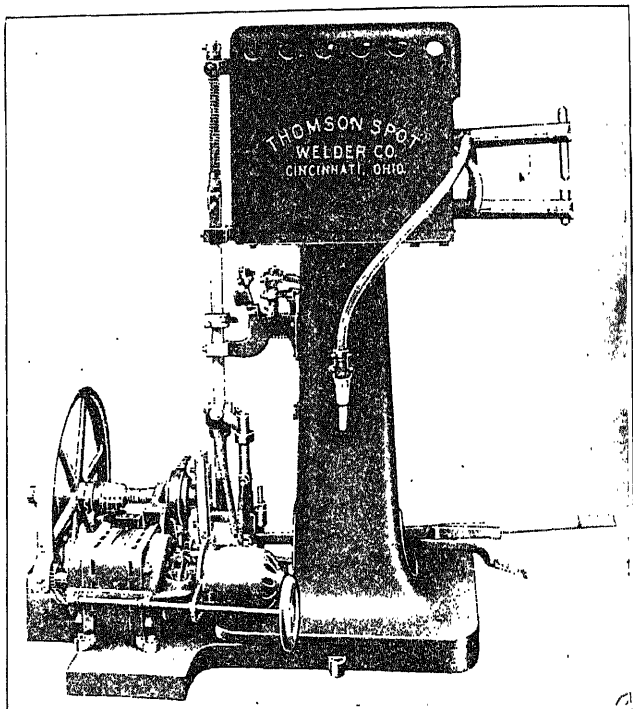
The Thomson Semi-Automatic Type Spot-Welding Machine.
